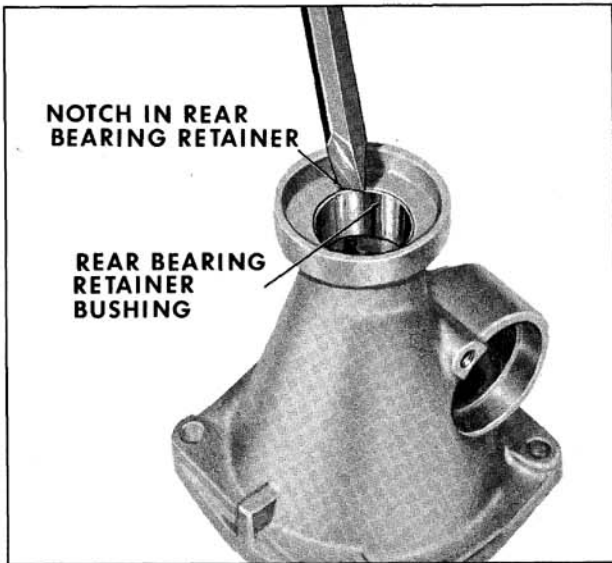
Removing Rear Bearing Retainer Bushing
